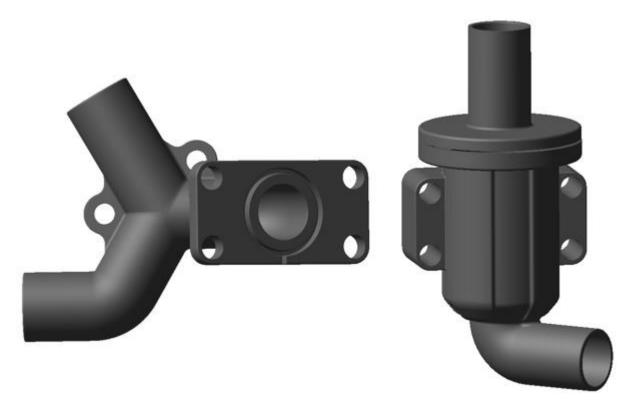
T.L The modified block with flange, T.R, The modified thermostat with flange
